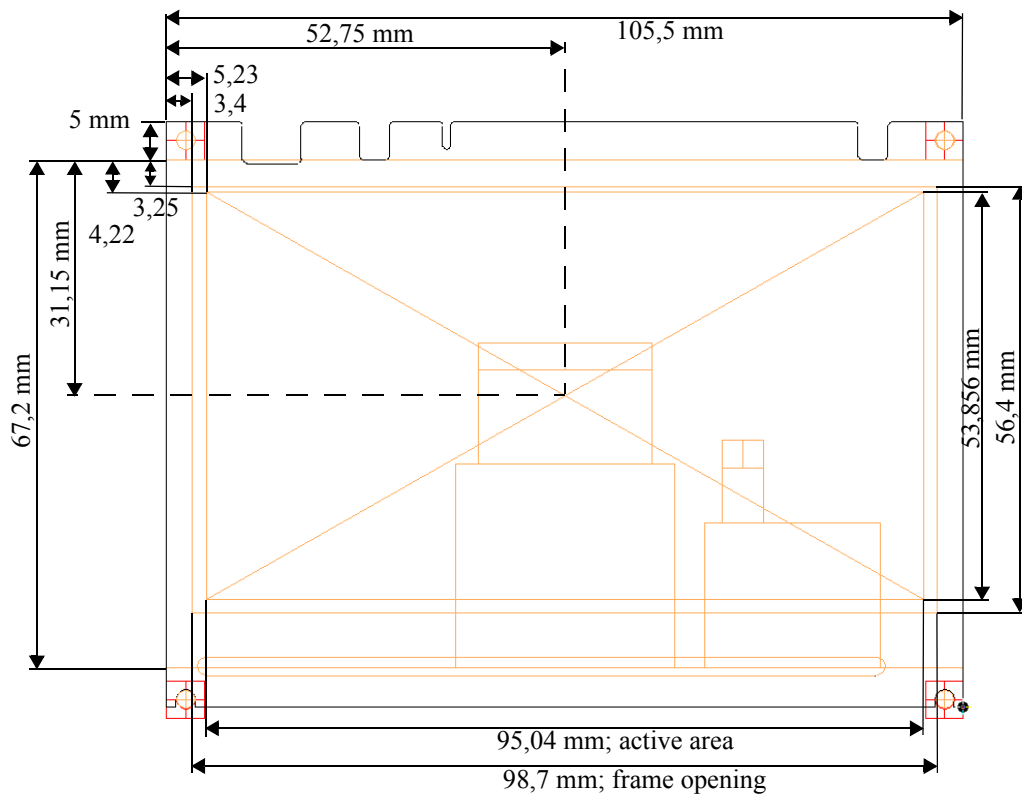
Assembly-Drawing & Dimensions of the i-PAN4 (bottom)
